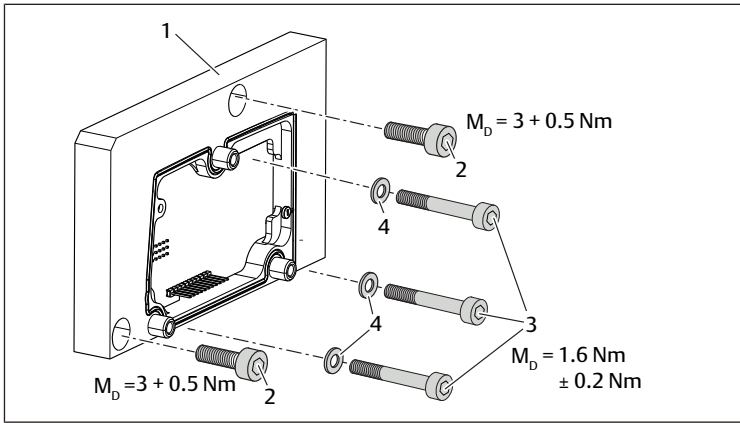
Mount the adapter module AES-B-design to the bus coupler
